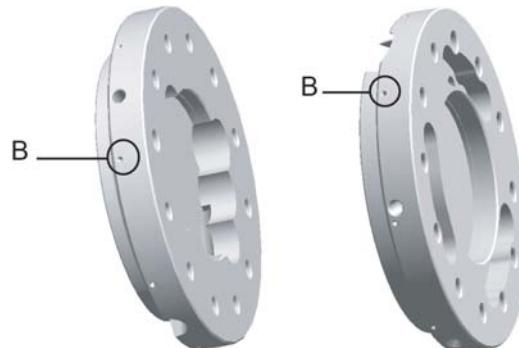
Seven holes B, on a radius of x mm from axis 6 center on the insulated tool flange.
